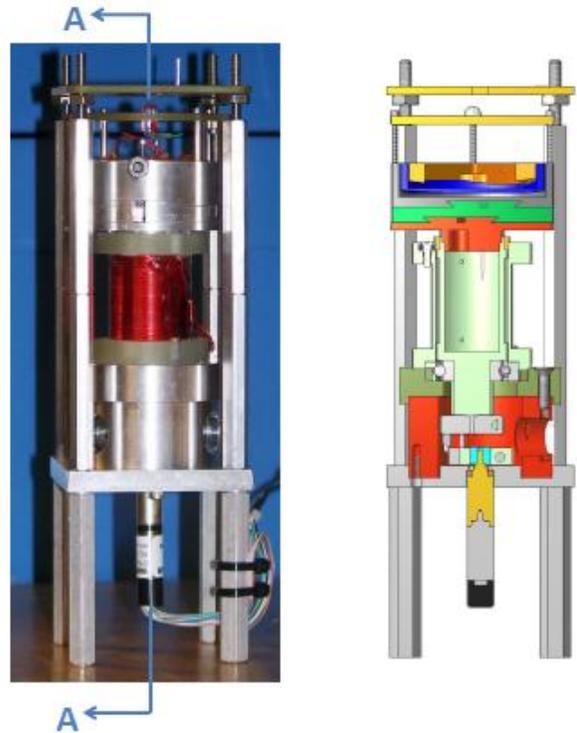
Bench-top prototype and testing apparatus for the accelerometer and rotating platform (middle), Section AA (approximate) of the accelerometer and rotating platform assembly (right)
